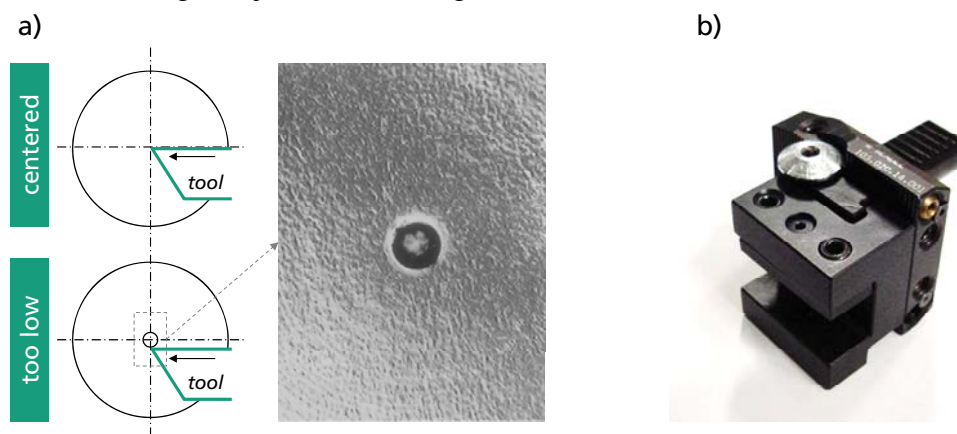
Pin generation due to tool deviation (a); Tool holder with manual high adjustment (b)
